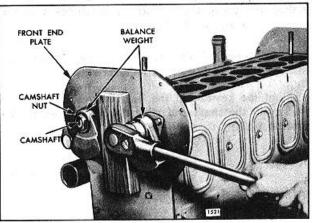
Loosening Nut on Camshaft or Balance Shaft.
